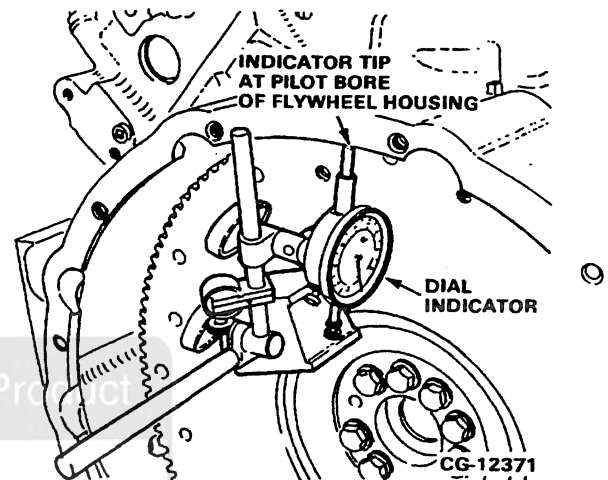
Check Flywheel Housing Pilot Bore Concentricity
